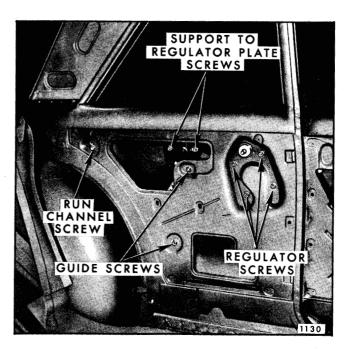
Rear Quarter Hardware Attachment - "X-11" Style
